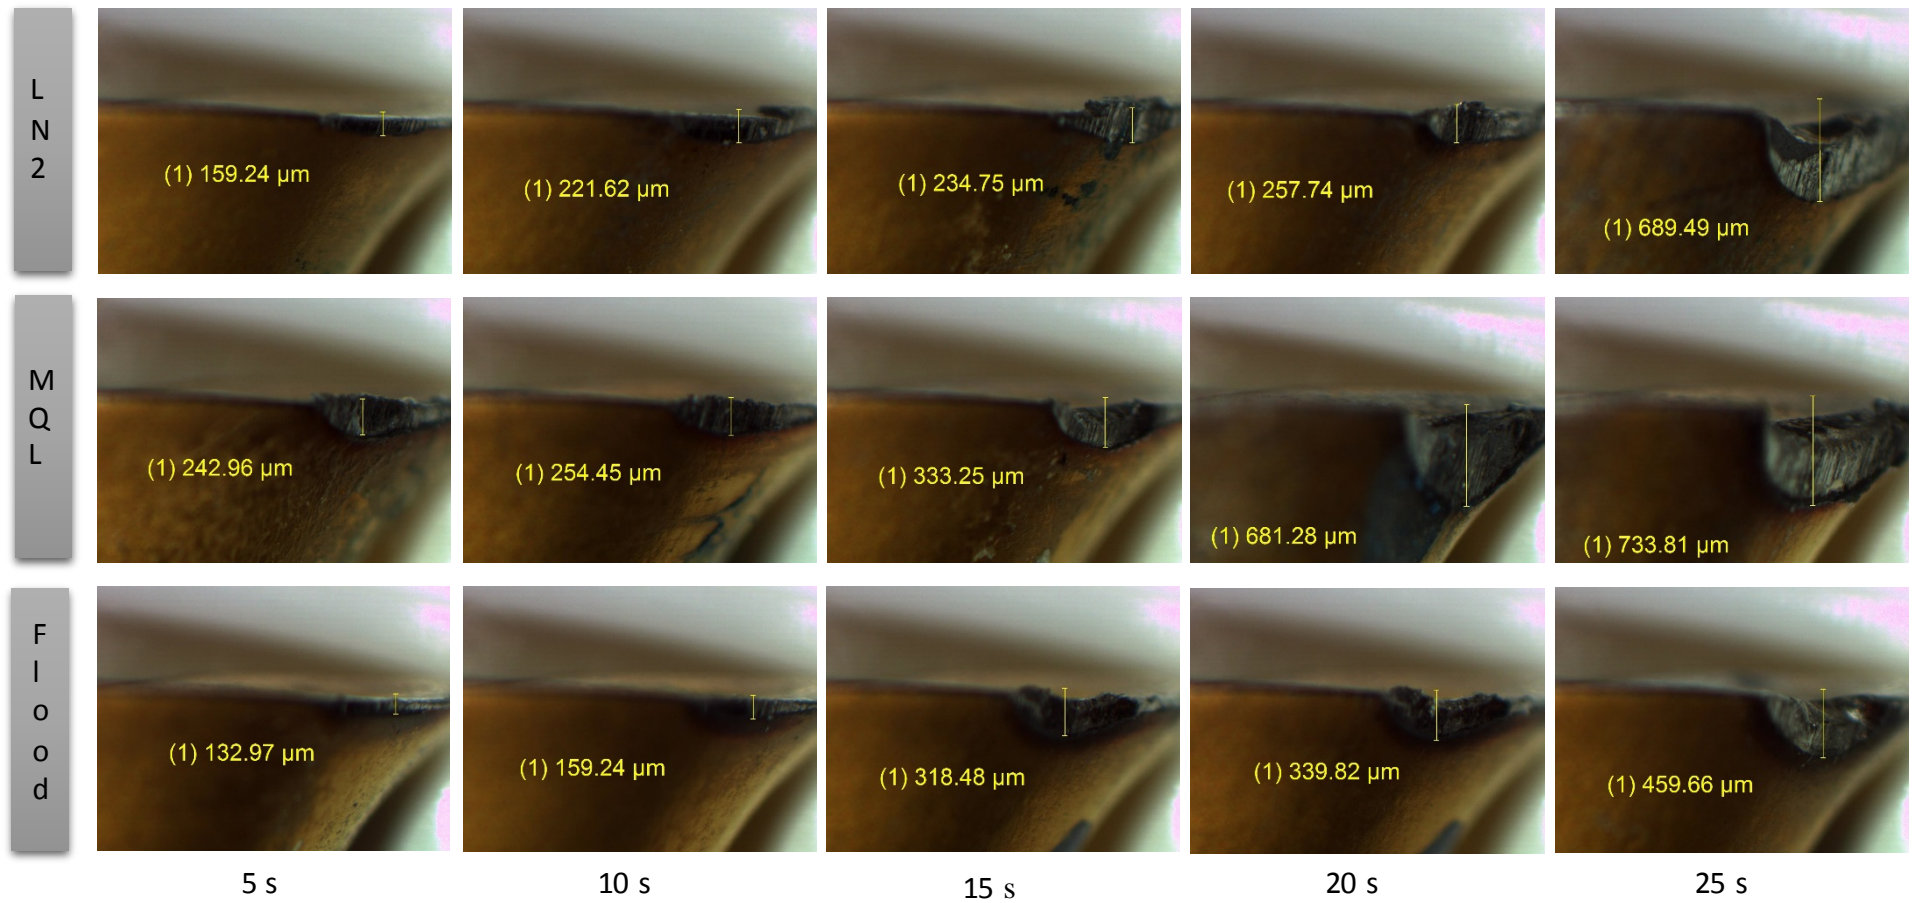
Measured flank wear after machining Inconel 718 samples
